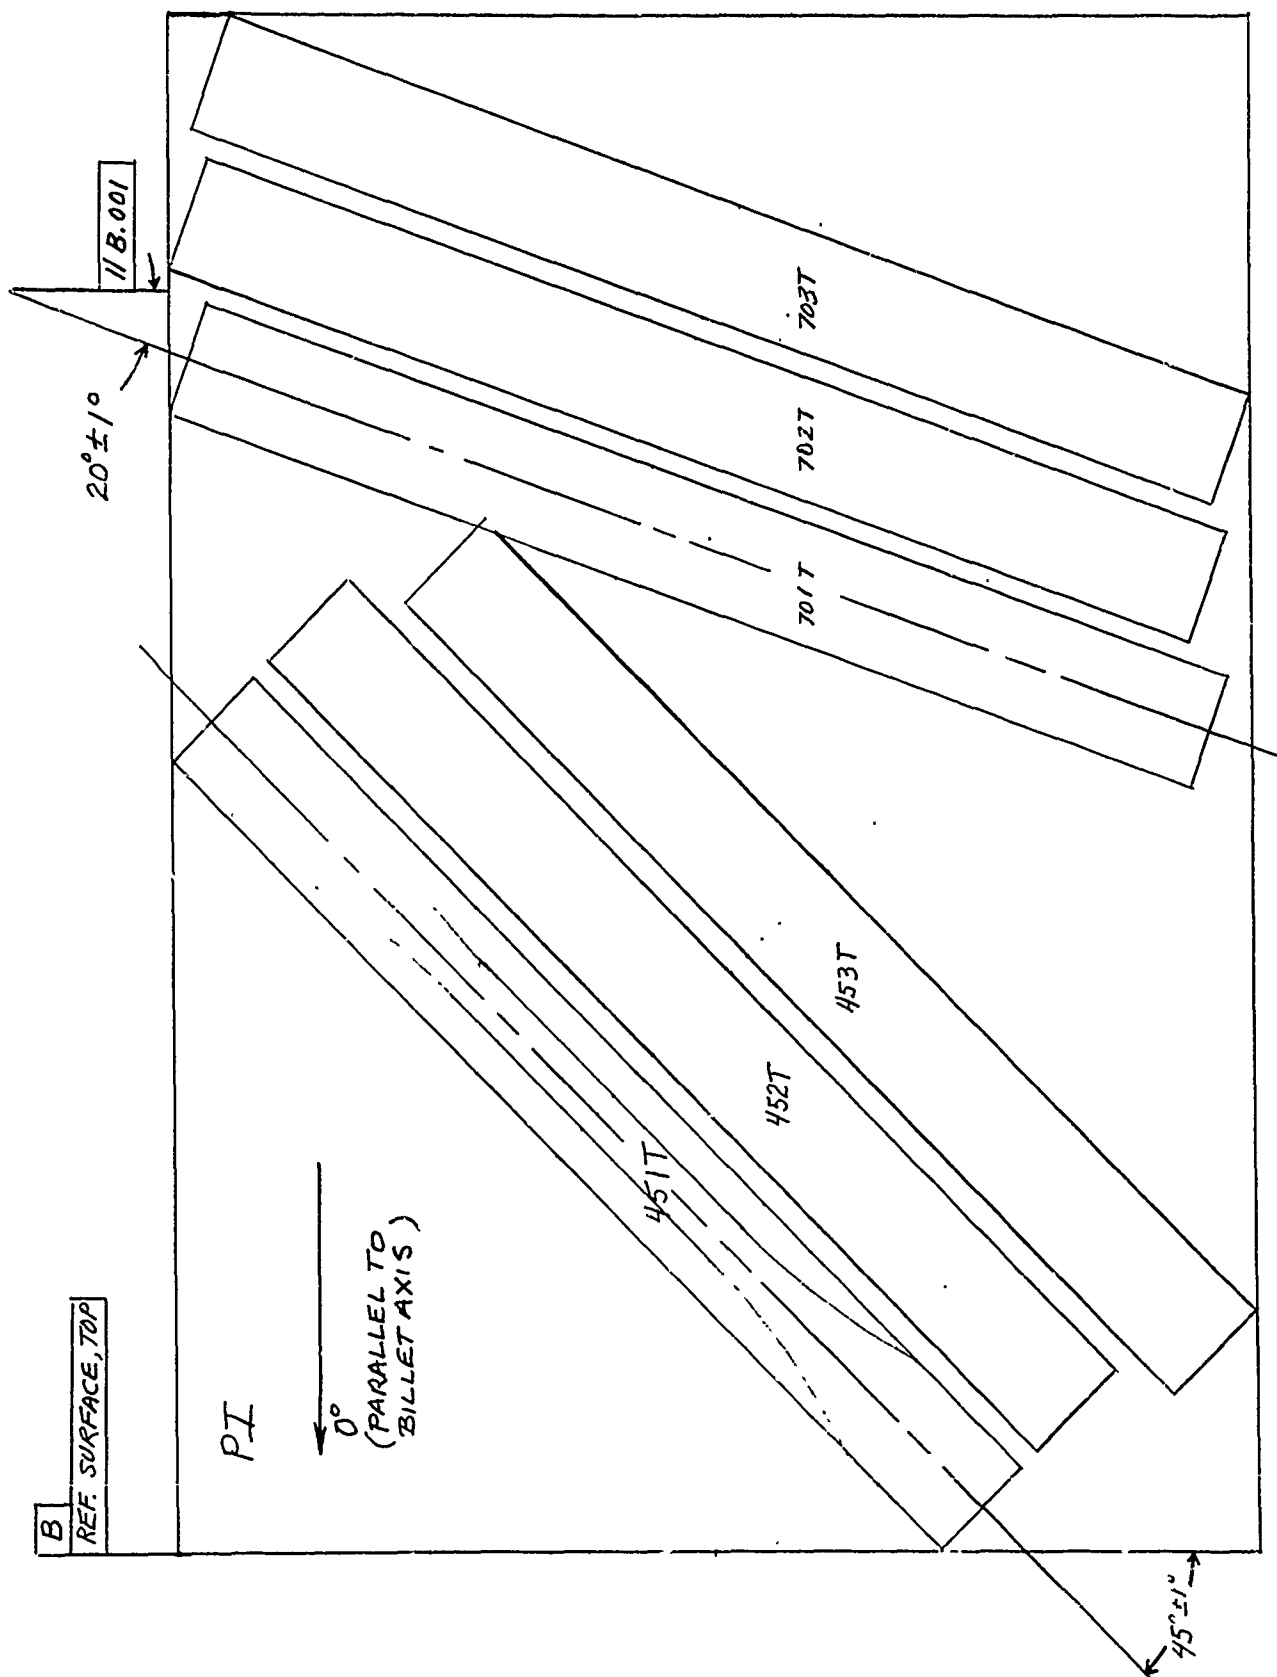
Cutting Plan for 45° and 70° Tensile Specimens
